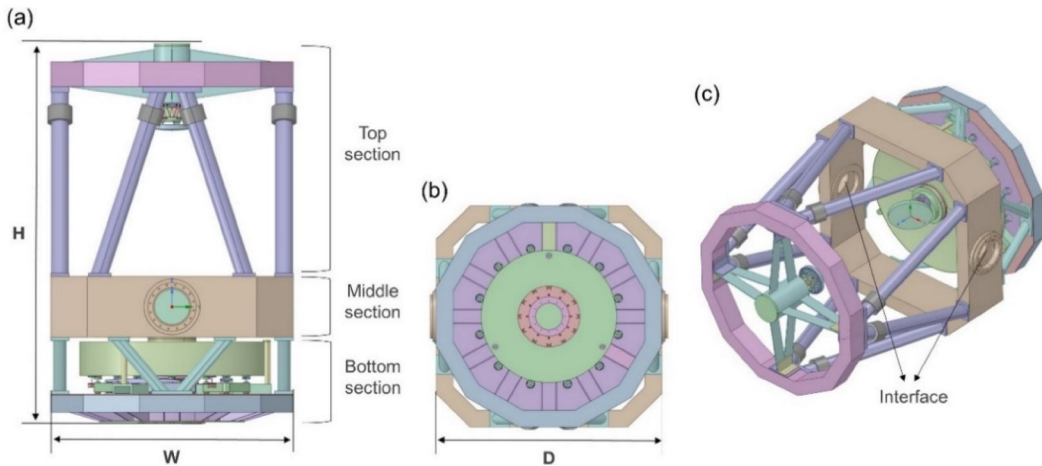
Overall configuration of the optical tube assembly (OTA). (a) Front view, (b) Bottom view, (c) Isometric view. W: width, H: height, D: depth.
